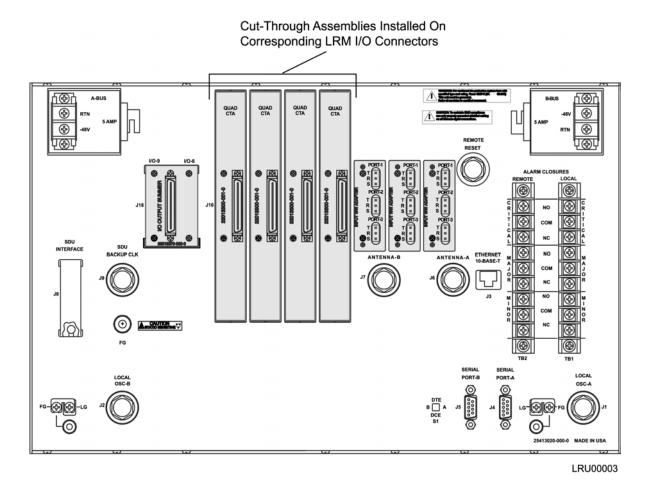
Installing the Cut-Through Assembly in the SSU-2000
